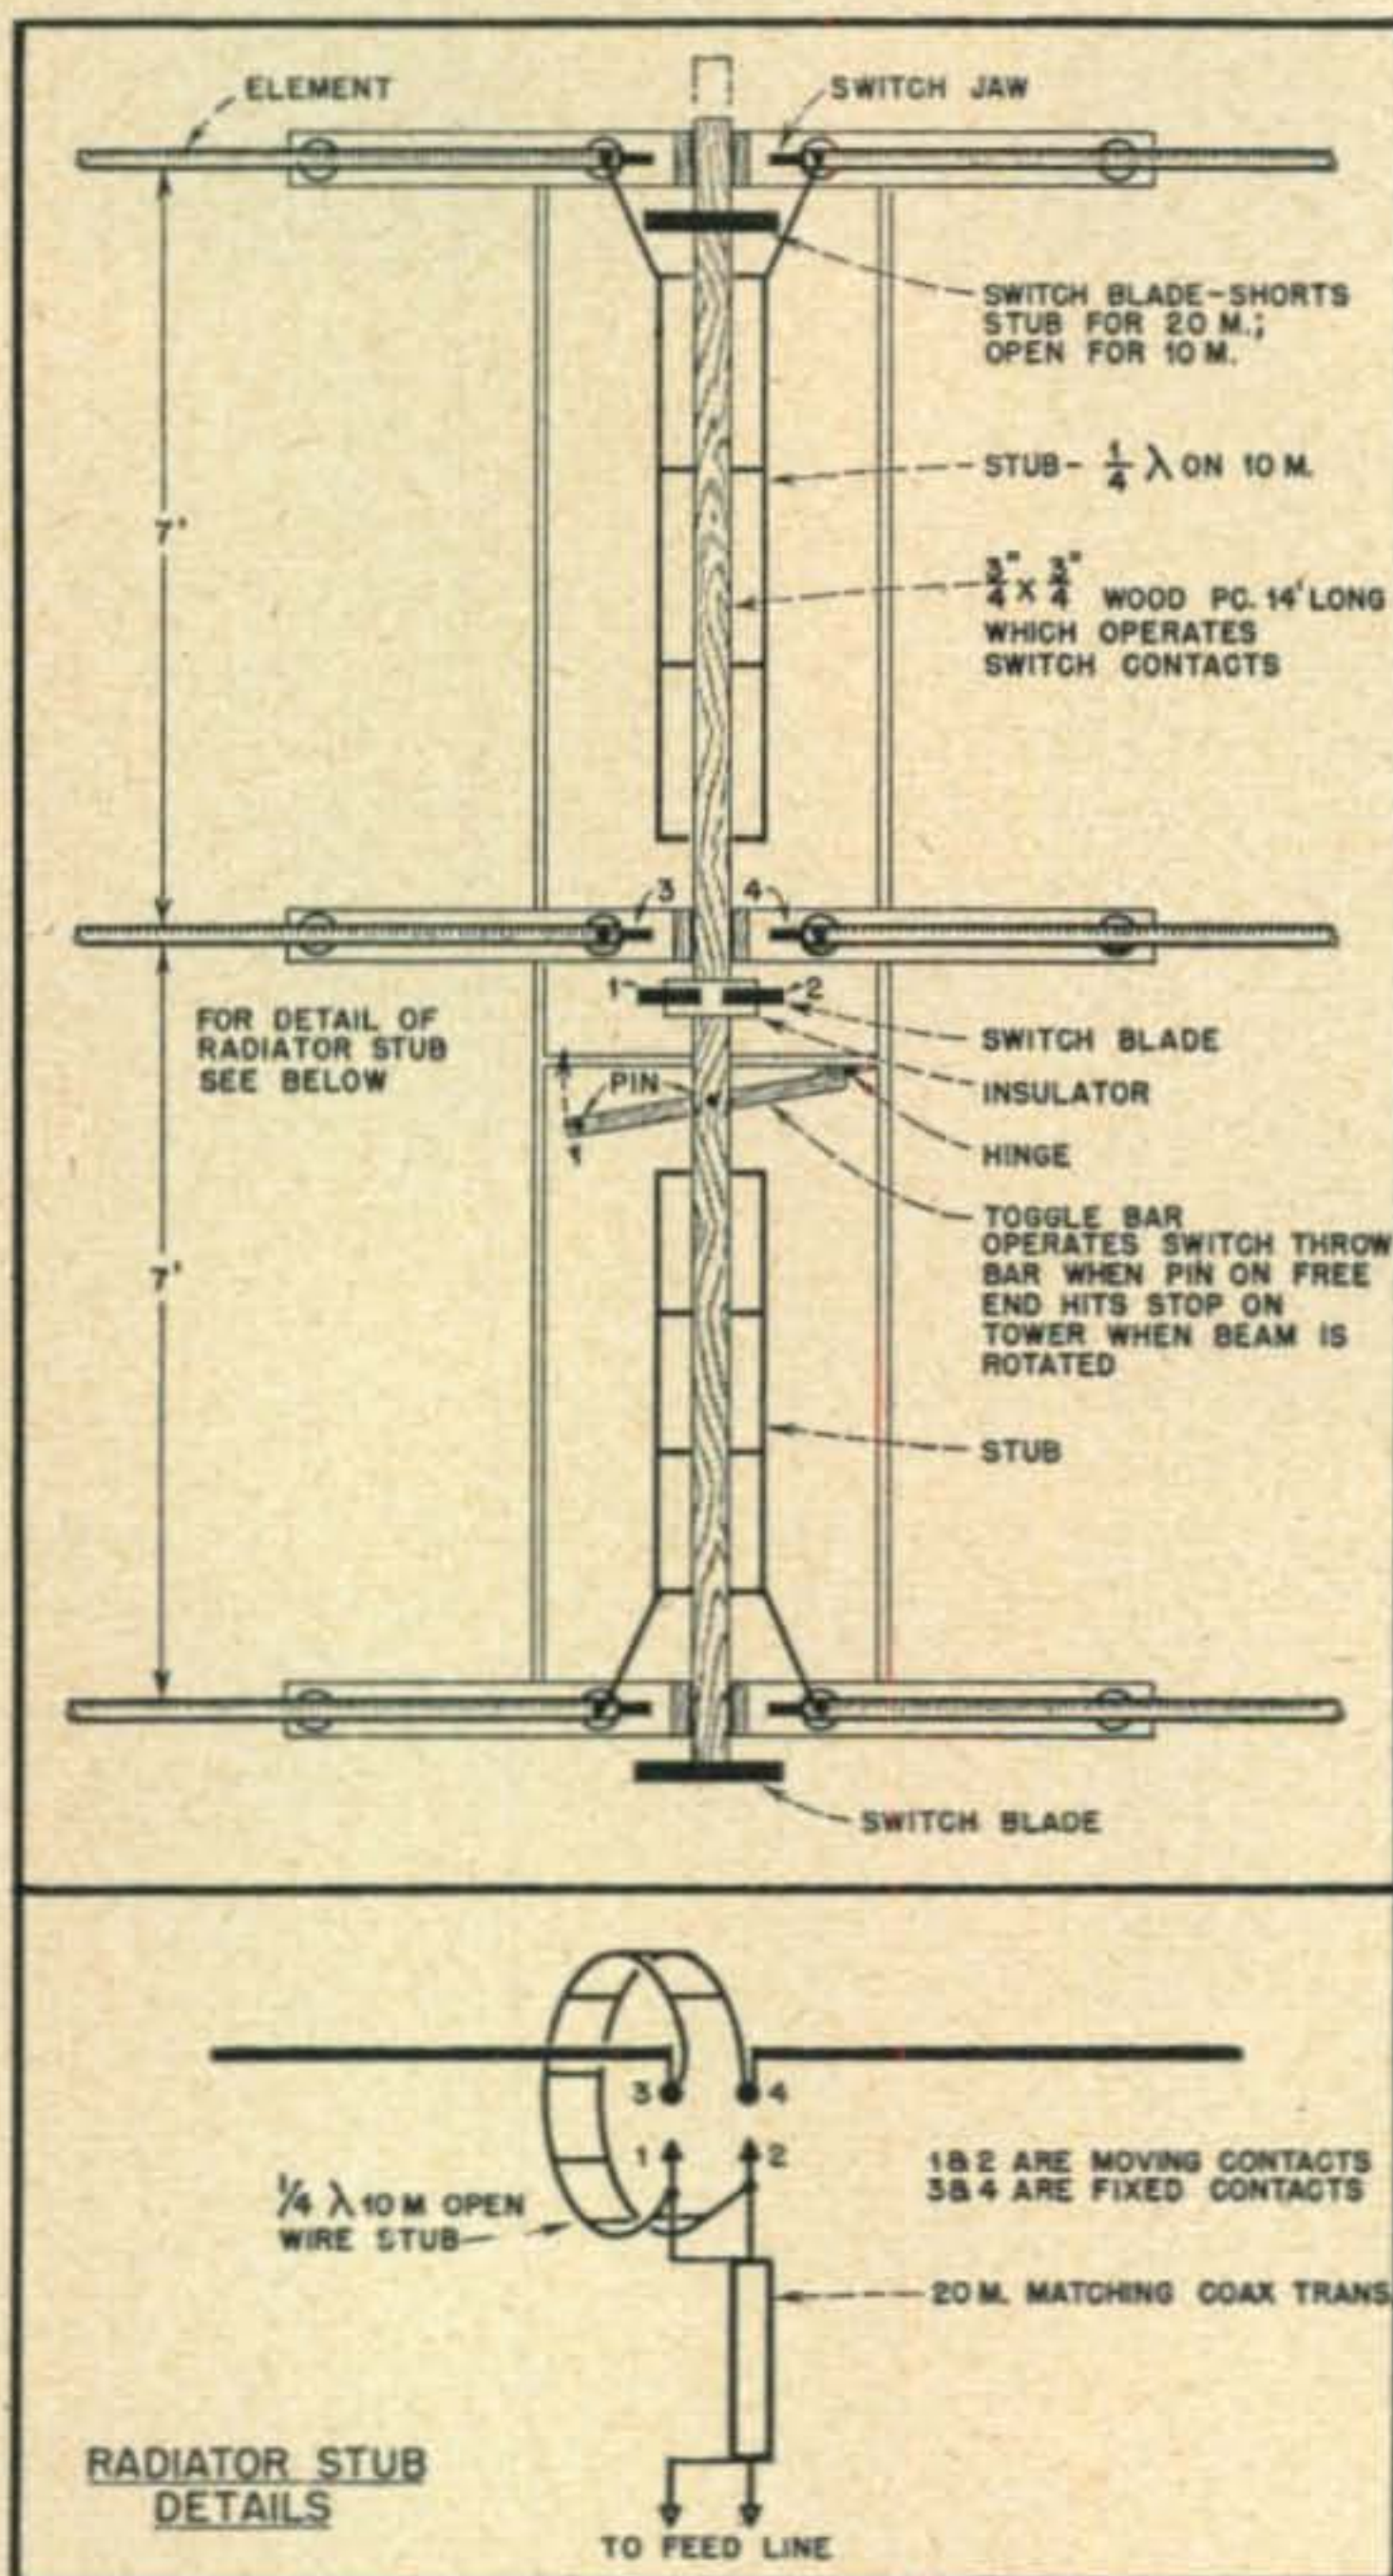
Mechanically actuated switch for going from one band to another as used at W2AFQ. Details of the complete beam and radiator stub are shown below the beam drawing.
